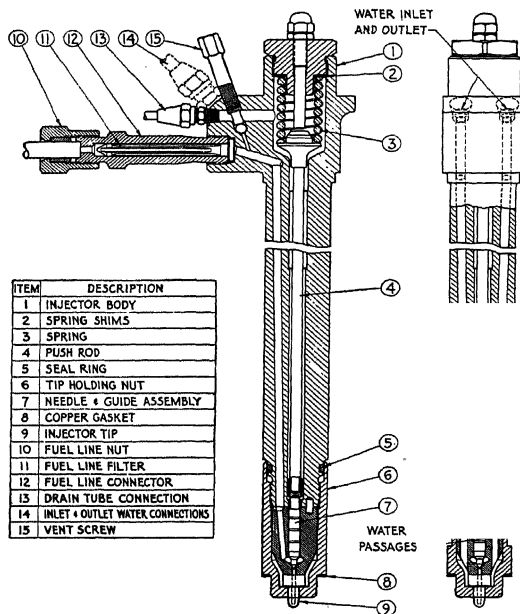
Mechanical-injection nozzle equipped for water cooling. (Courtesy of Aircraft & Diesel Equipment Corporation.)
